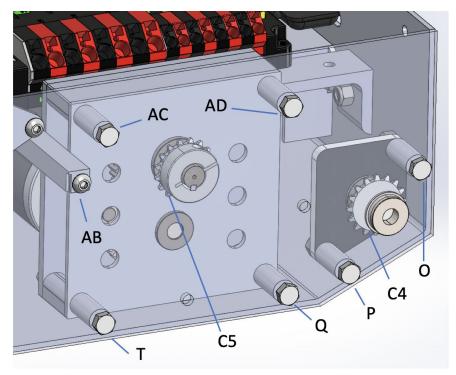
Left hand gearbox and bearing block view through transparent chassis side
